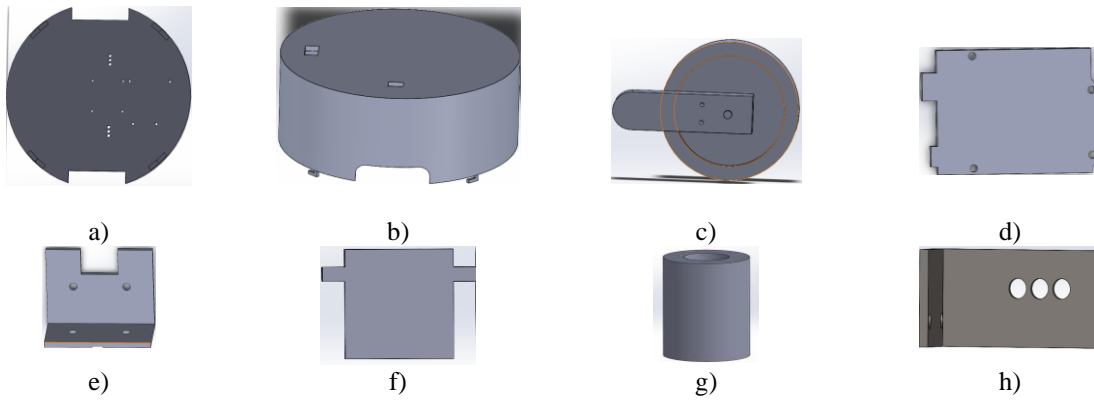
Modeled components: a) bottom casing, b) top casing, c) wheel and motor, d) Arduino Uno R3, e) sensor holder, f) SG90 servo motor, g) spacer, h) motor holder
